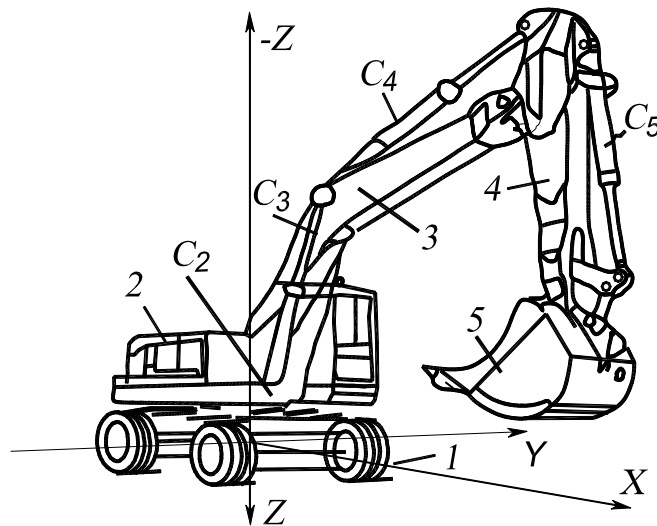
Physical model of a hydraulic BTH-600 excavator: 1 - undercarriage (pneumatics), 2 - rotary link (platform), 3 - boom, 4 - arm (stick), 5 - bucket
